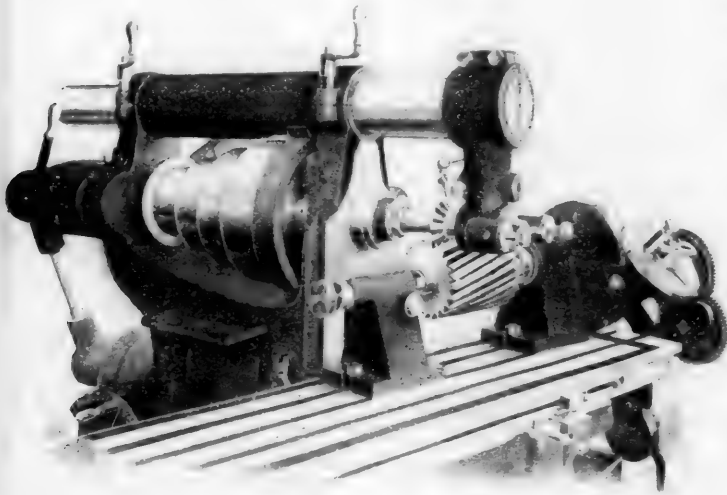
MILLING A HEAVY SPIRAL CUTTER.
